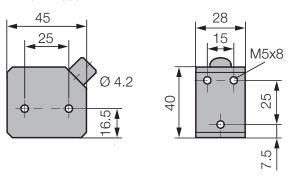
Installation dimensions of BTL5-P-4500-1 magnet
